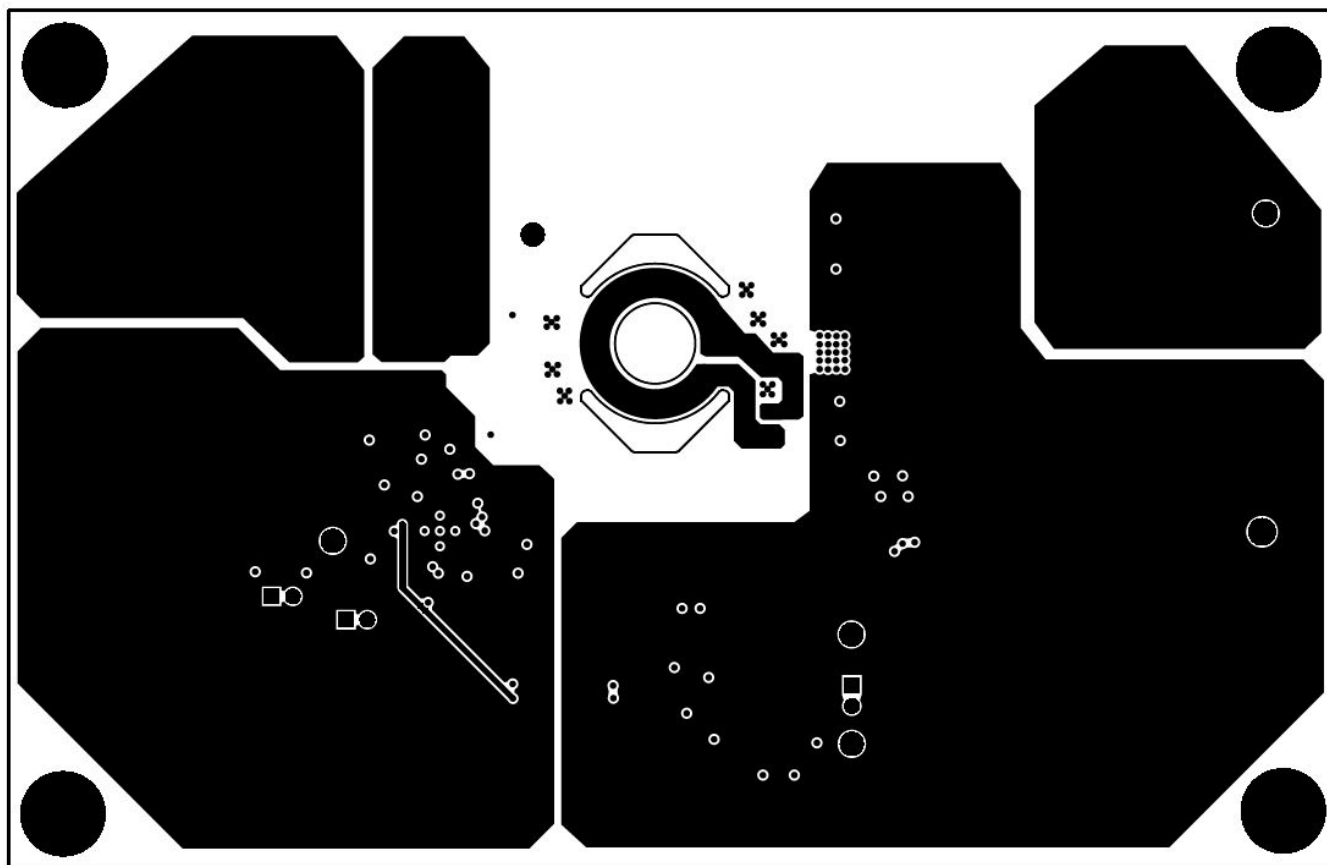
LM5036 EVM: Layer 9 PCB Assembly layout
